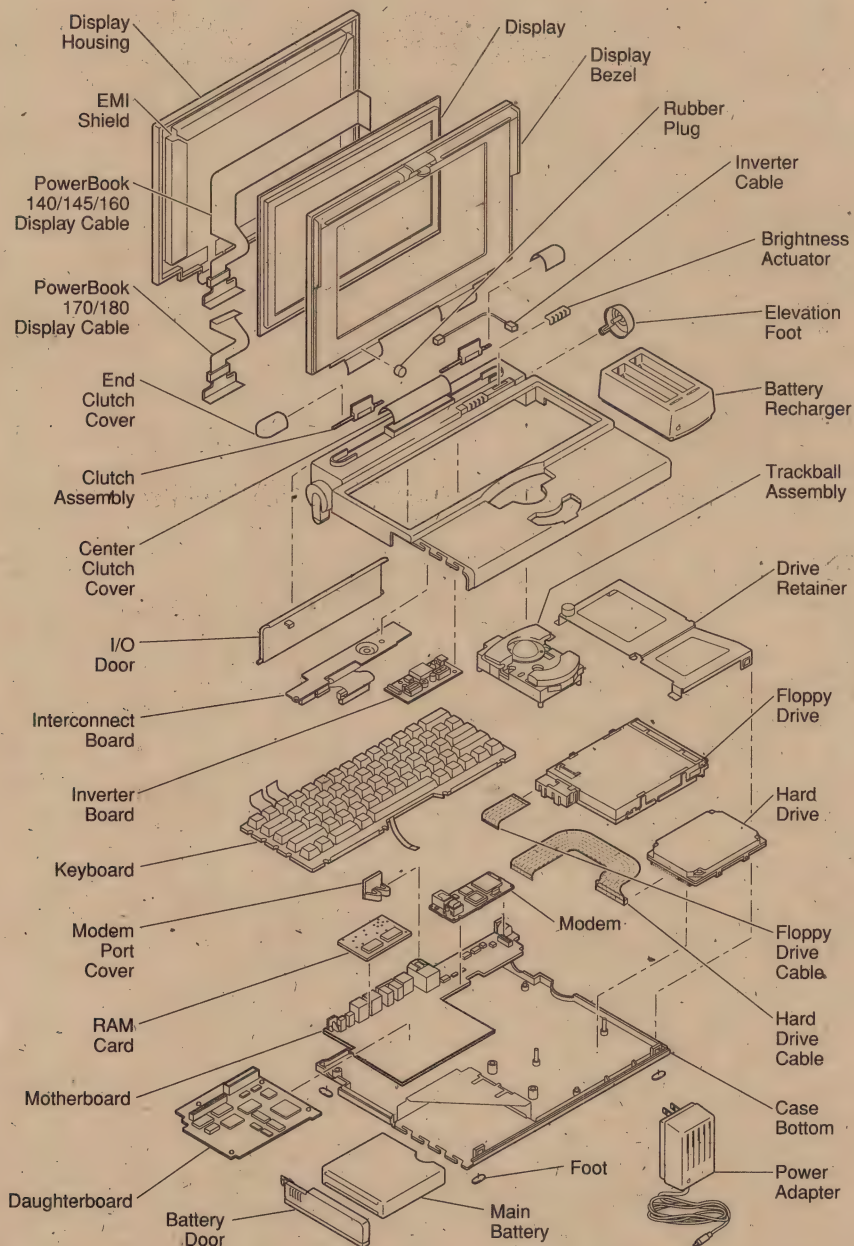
Macintosh PowerBook 140/145/160/170/180 Exploded View
